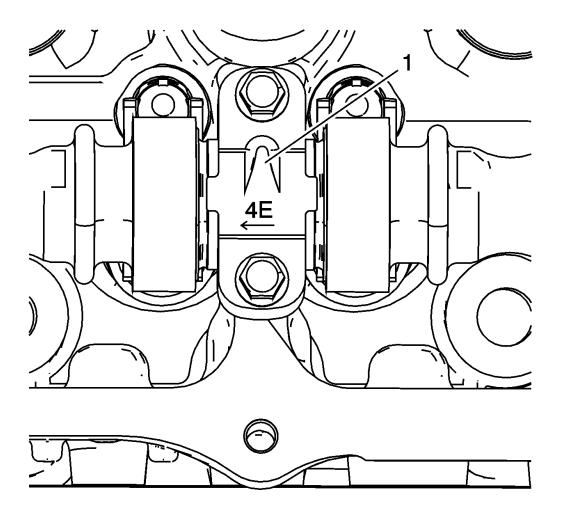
View Of Camshaft Flats Parallel With Camshaft Cover Rail Courtesy of GENERAL MOTORS COMPANY
